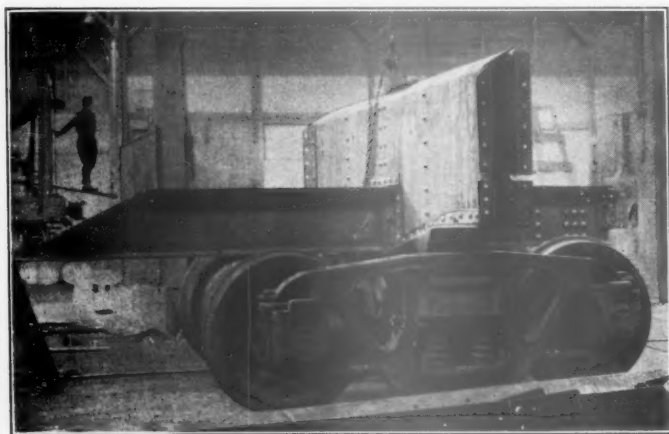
Center Sills and Bolster Assembled and Placed on Truck
